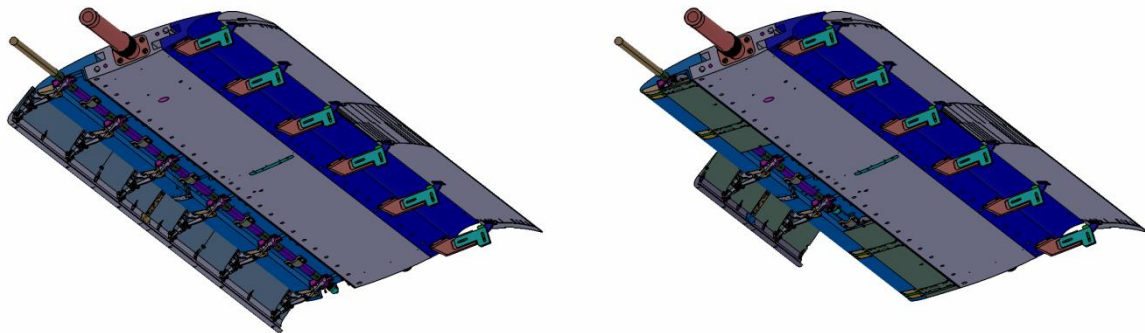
setup of wind tunnel model with (left) full span and (right) part span Krueger flap
